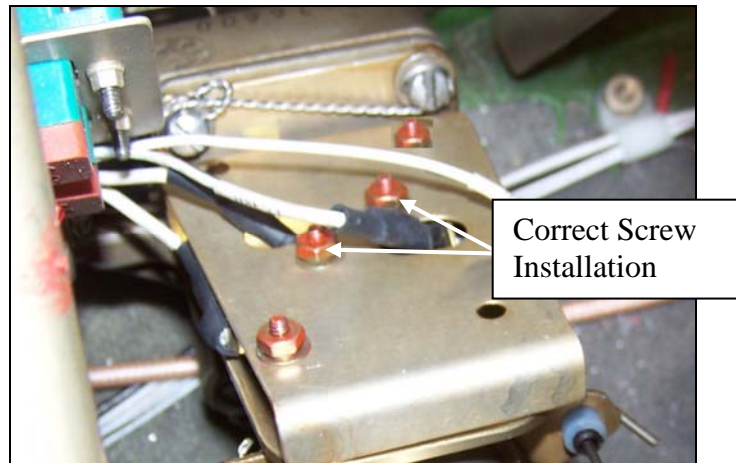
Properly Installed Screws – The heads of the inner screws face the spring capsule.
